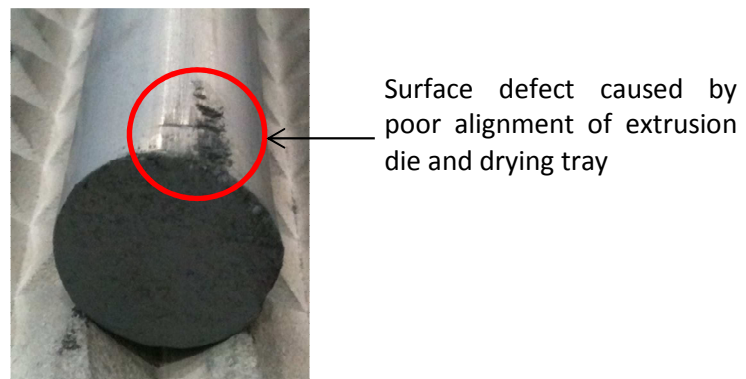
ECETHPVB cross-sectional surface with surface defect damage shown
